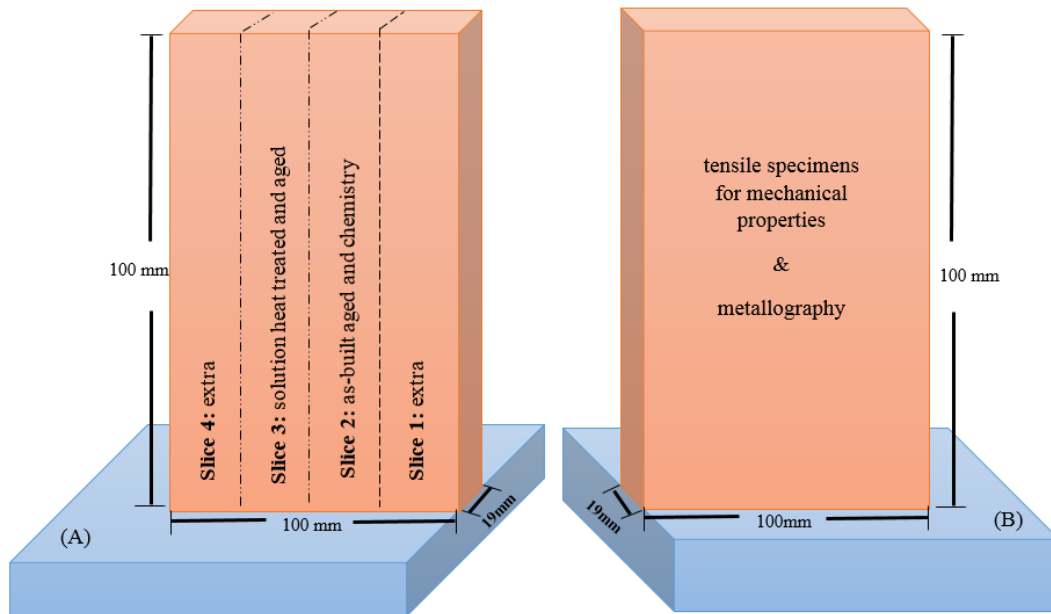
Build sectioning and allocation for aging specimens and tensile specimens.
